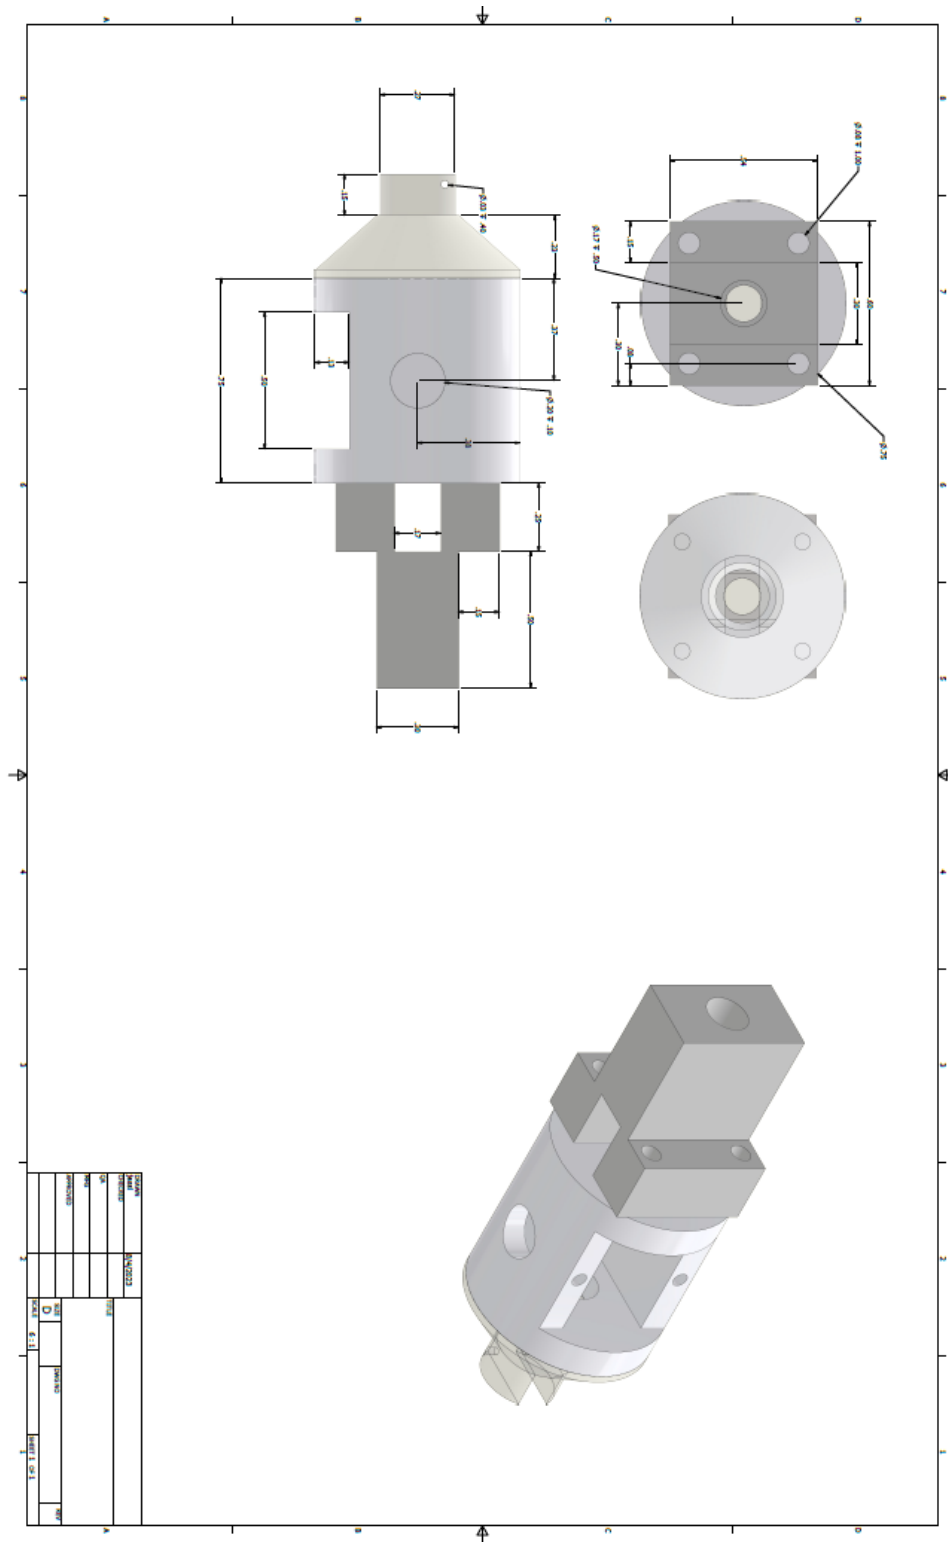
Single piece 3.2mm spinning assembly and homogeneity probe adapter.
